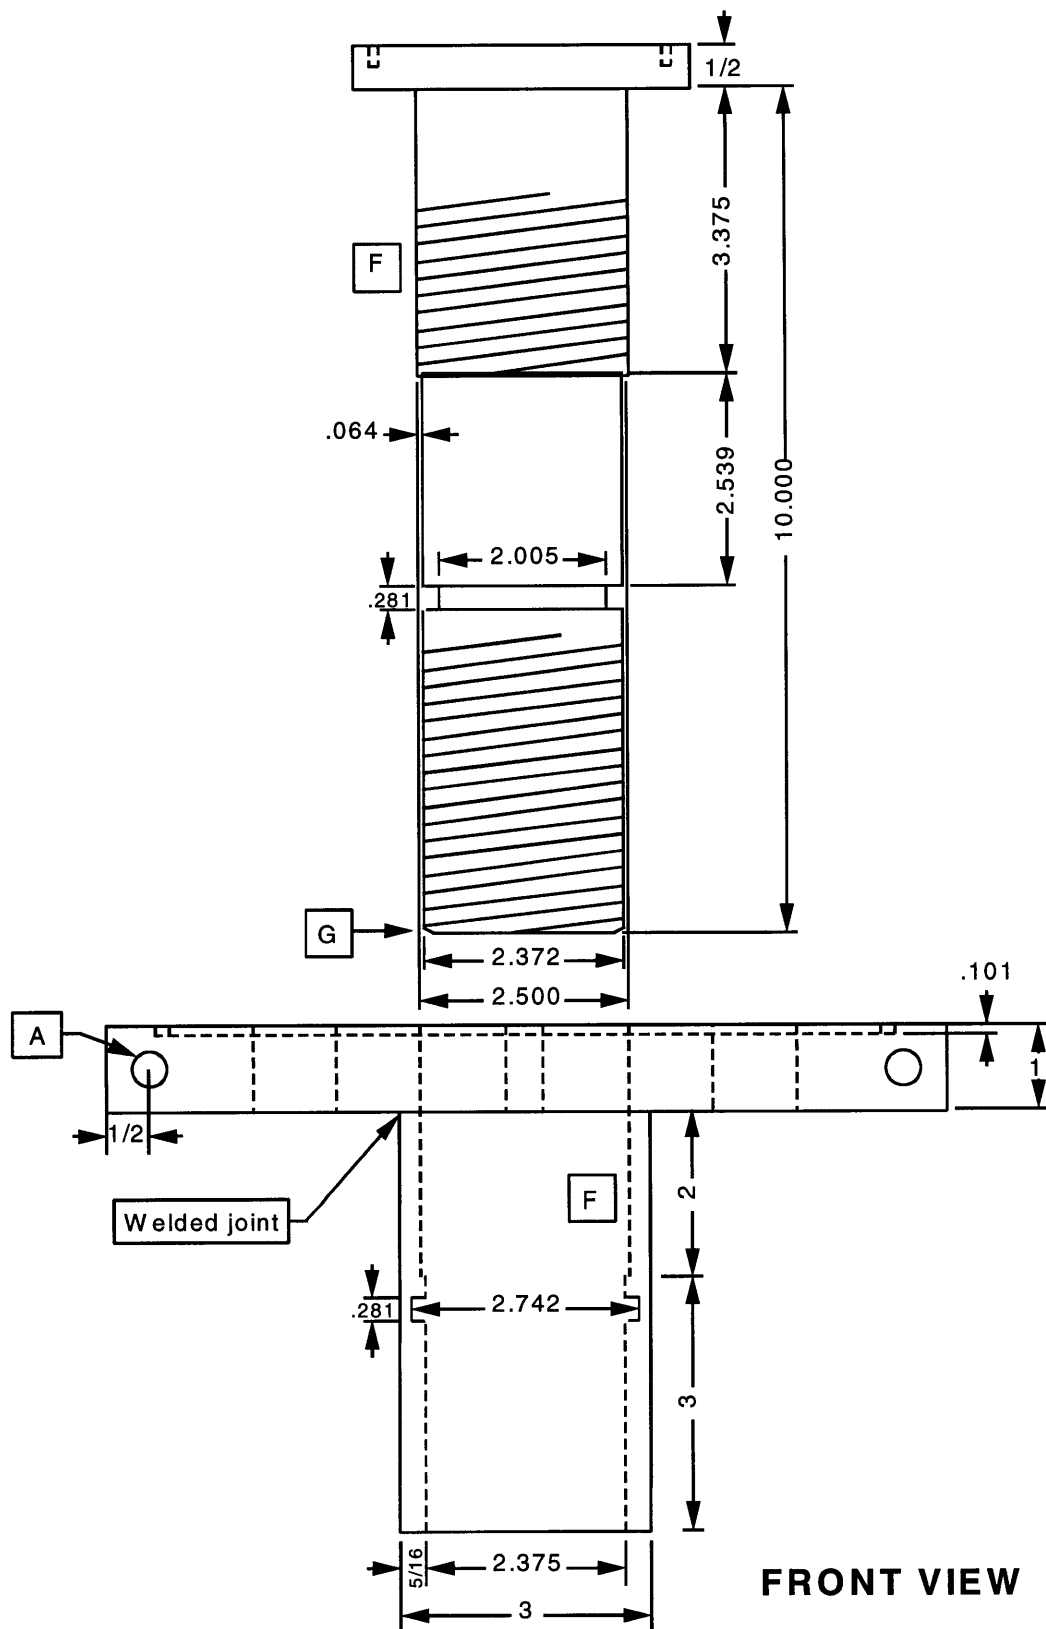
Drawing of modified reactor bottom plate (front view)
